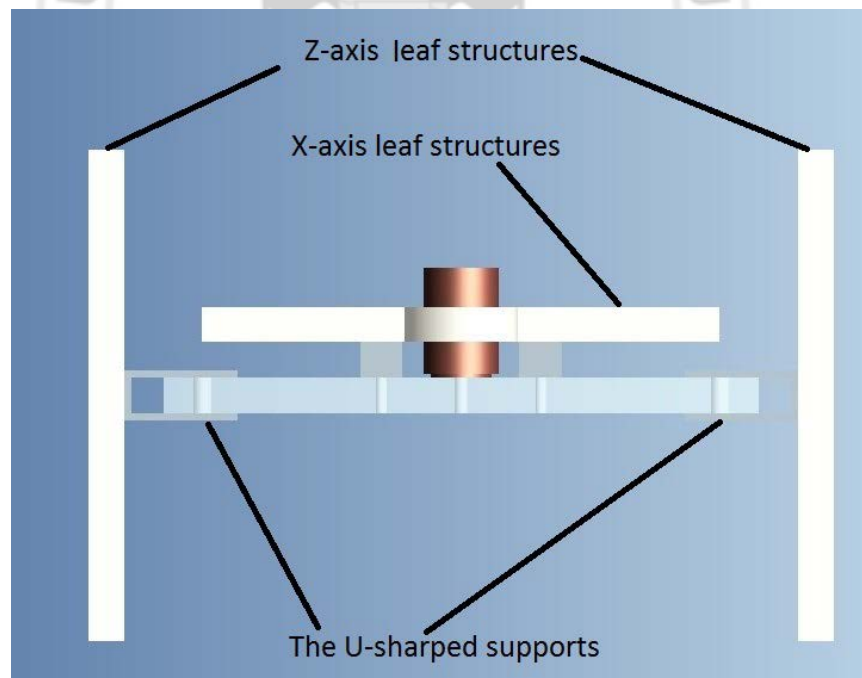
15 The side view of the assembly model of the X-axis and Z-axis structures
